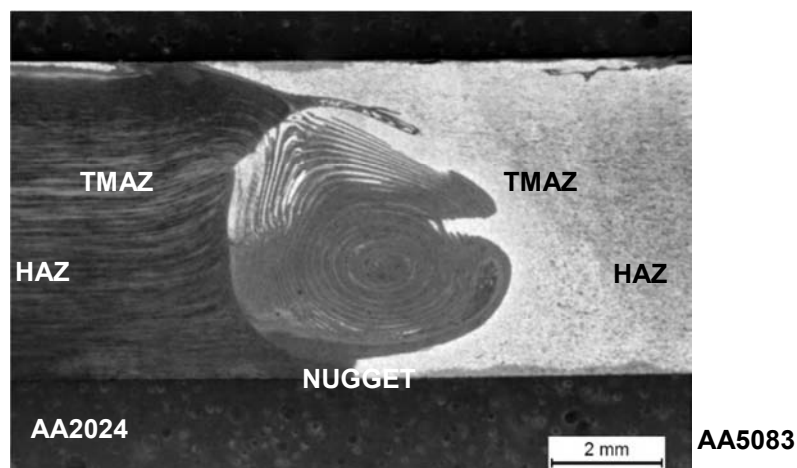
The macrostructure of cross-section of welded joint.
